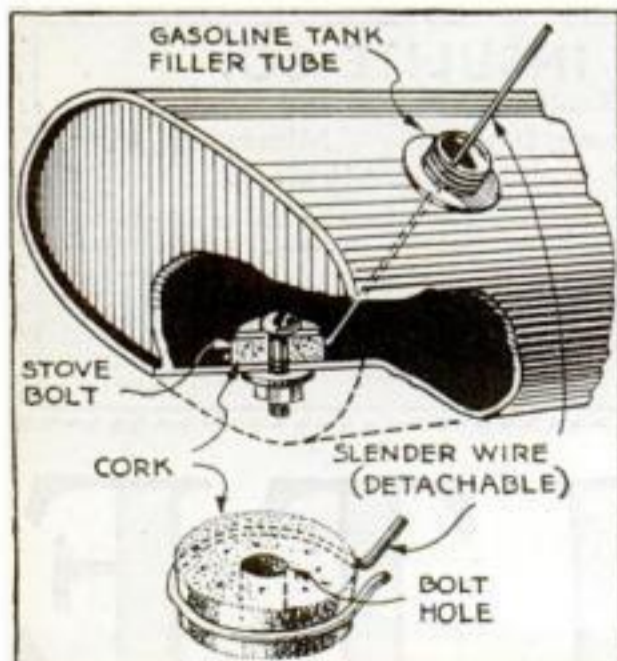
A cork, a screw, and a washer can be successfully used to repair hole in gas tank.
